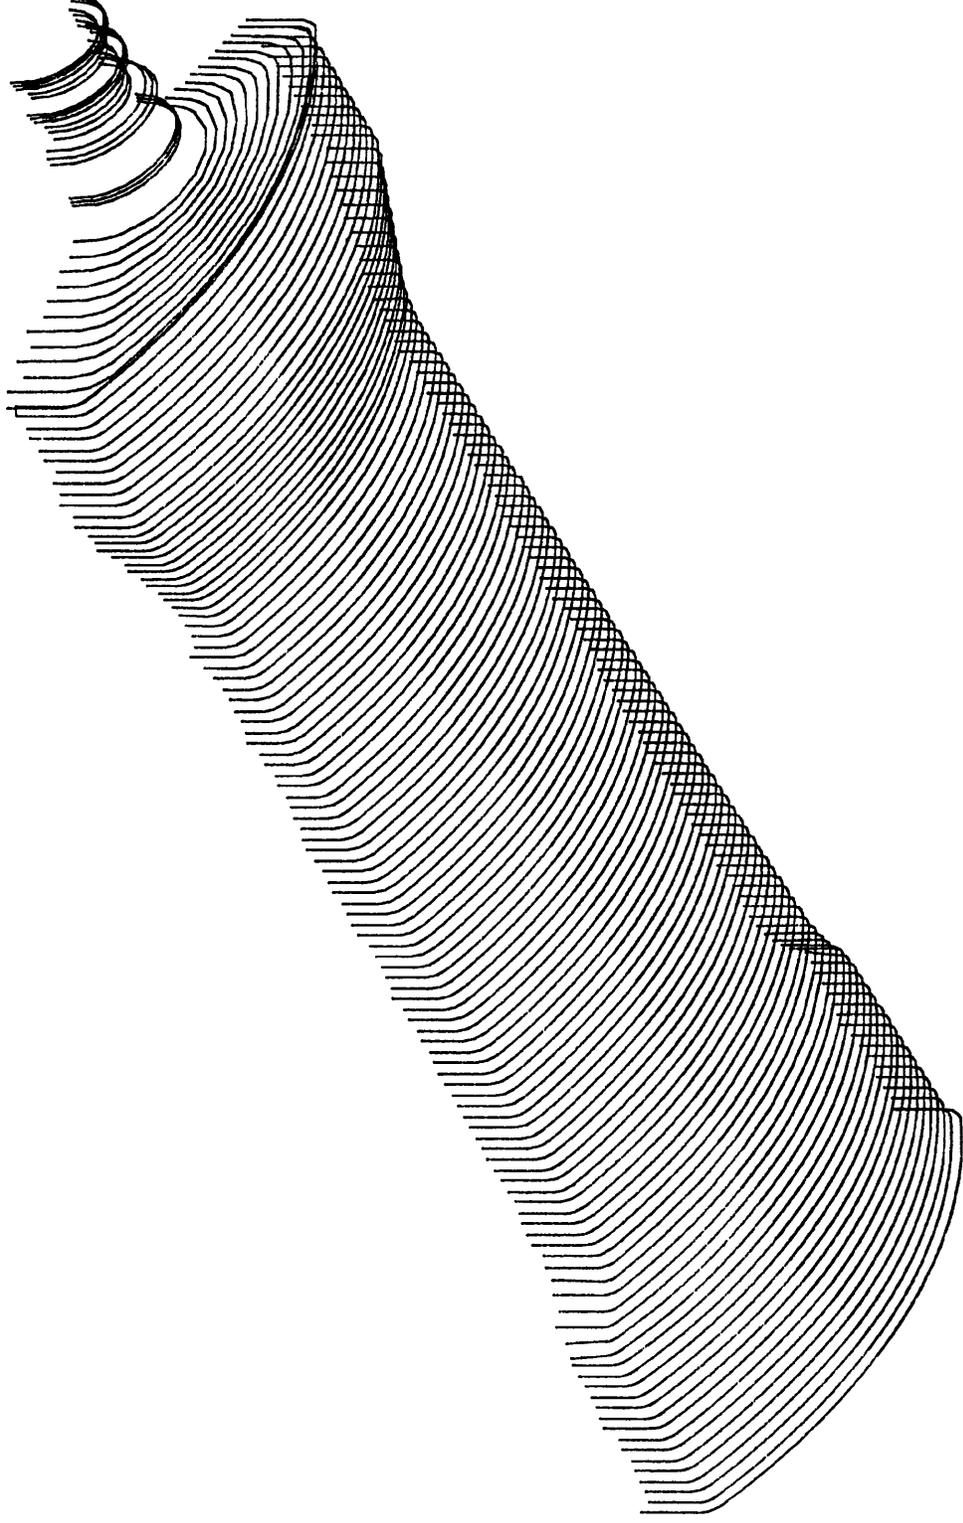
The toolpath geometry used for the machining of the bottle mould
